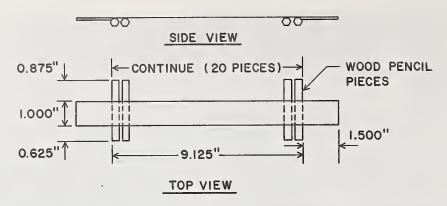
Details of former used for pressing 2-mil-thick plastic strips against vacuum holes in cell mold.
